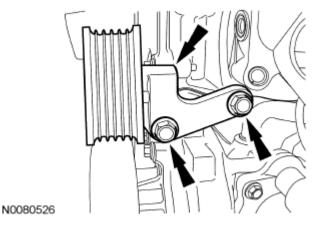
Locating Accessory Drive Belt Idler Pulley Bracket With Bolts Courtesy of FORD MOTOR CO.
